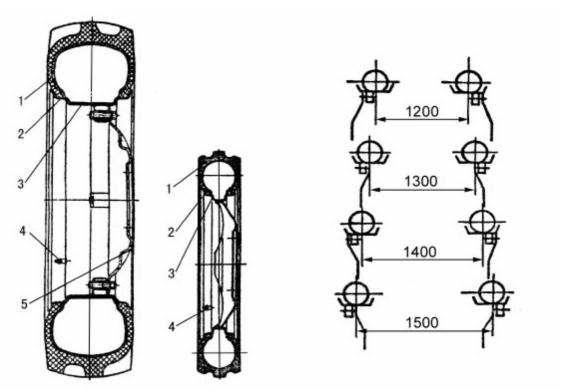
driving tire directive wheel 1 outer cover 2 inner tube 3 rim assembly 4 air nozzle 5 radial plate
